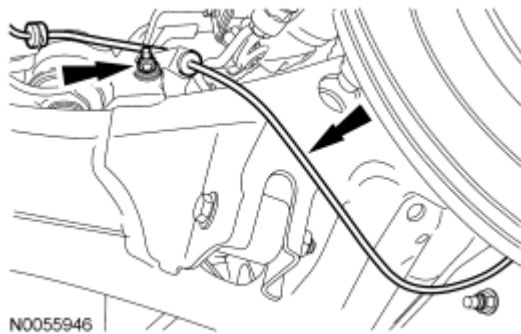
Identifying LH & RH Wheel Speed Sensors Nuts
